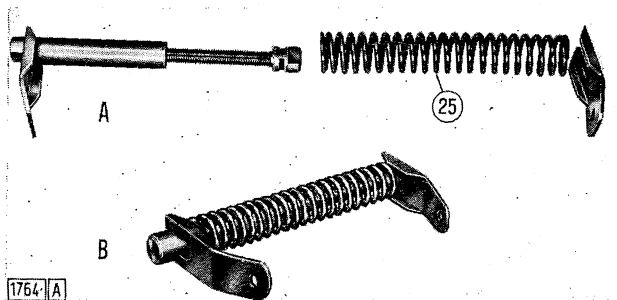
Arranging the differential lock return spring (25) on the tool A 287033.
